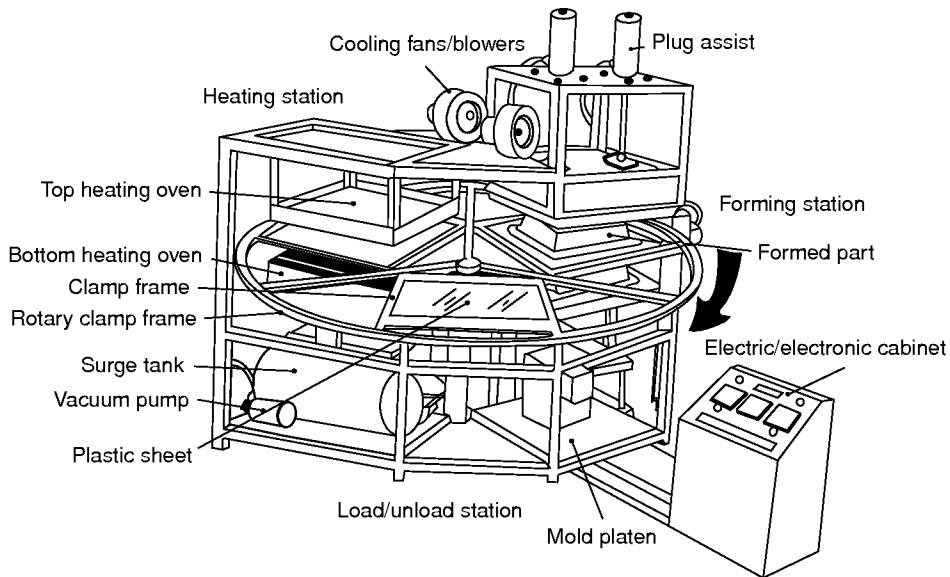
Schematic of heavy-gauge rotary thermoforming machine (15). Used with permission of Hanser Publications.
